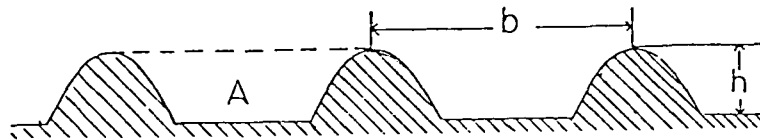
/5: Cross-Sectional View of the Grooved Tubes
